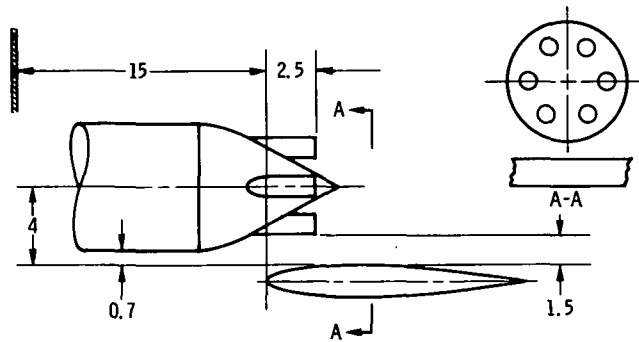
Nozzle dimensions. (All dimensions are in inches.)
